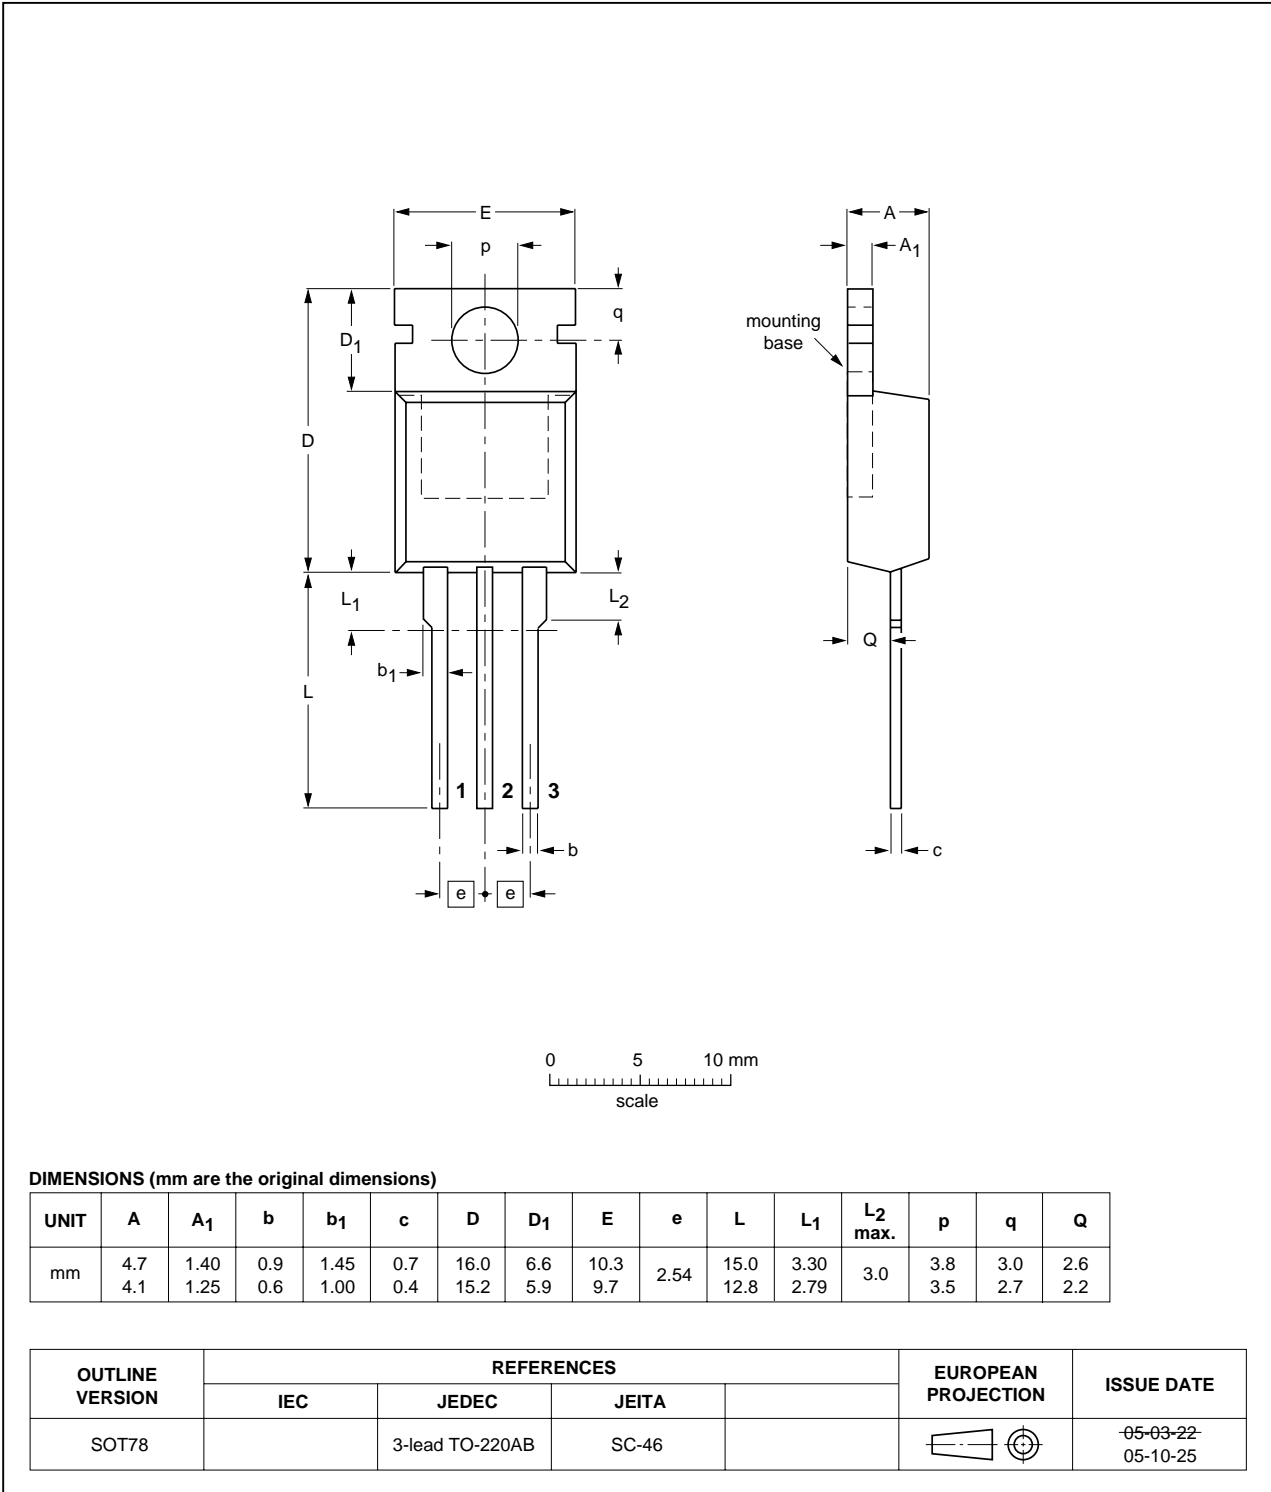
Package outline SOT78 (3-lead TO-220AB)
